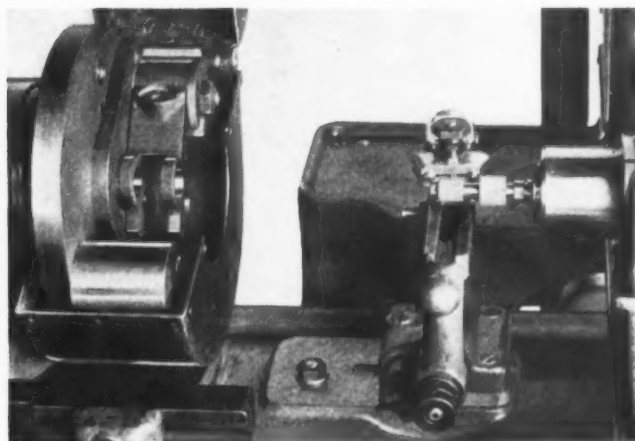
Another Example of Grinding Two Bores Simultaneously, with Wheel Dressers Shown in Position for Dressing Wheels
